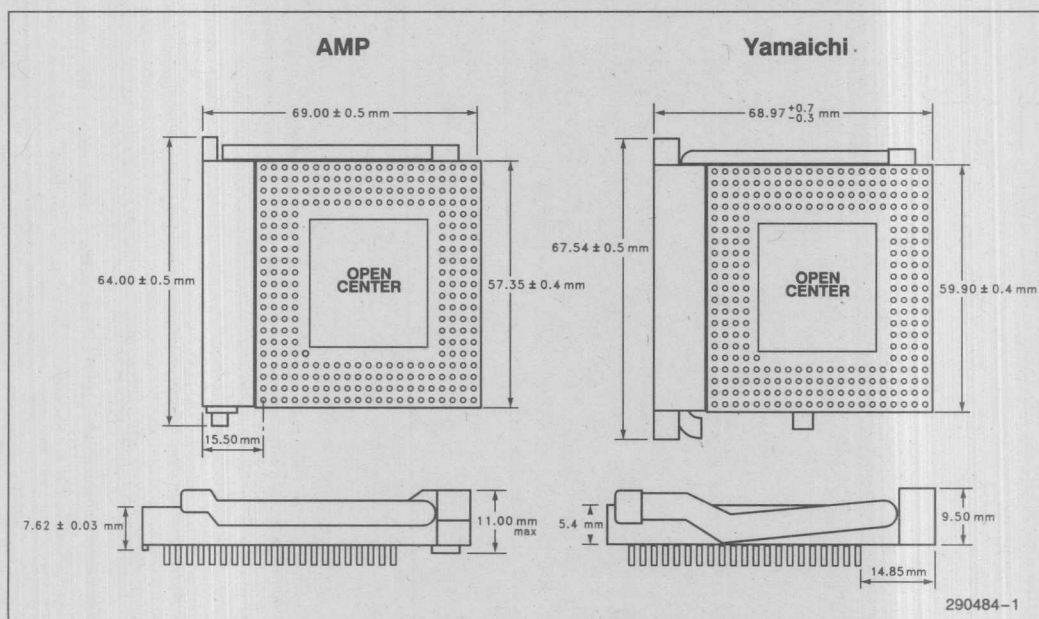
OverDrive™ Socket Footprint Dimensions
